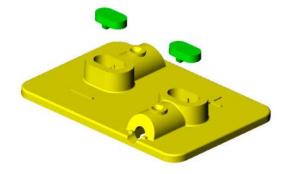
A sketch of the "Cord-Plate" contact termination fixture
